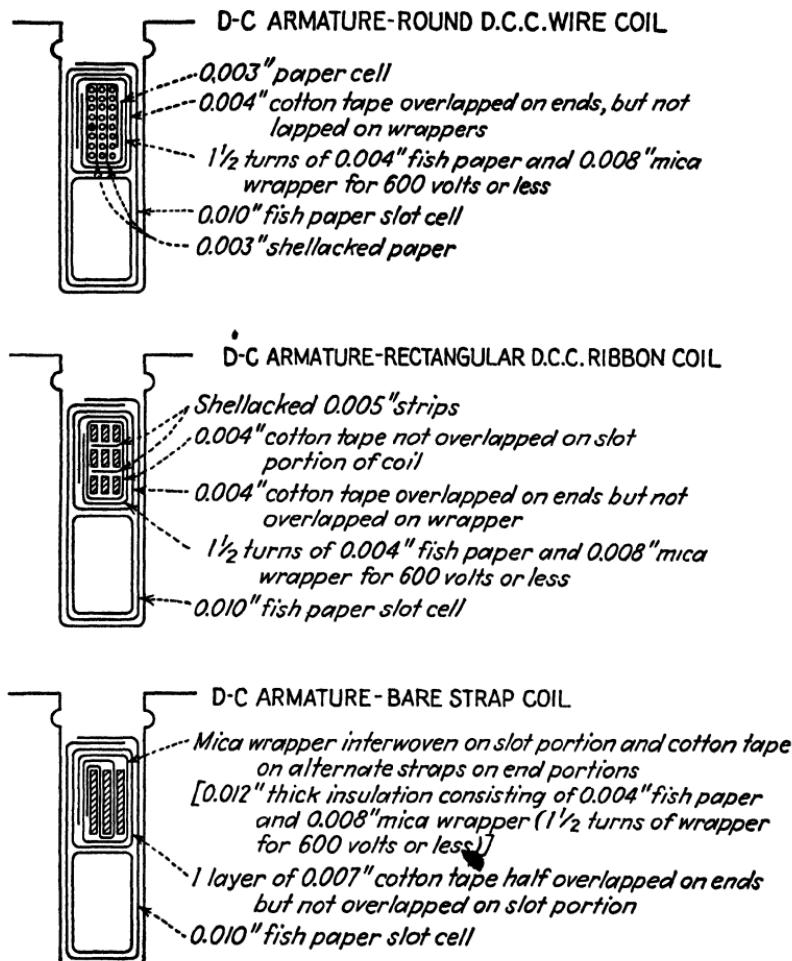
Slot insulation of direct-current motors. (Courtesy of Westinghouse Electric & Manufacturing Co.)
